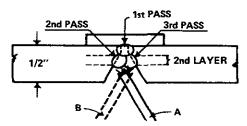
Multi-Layer Deposit - Overhead Butt Weld
